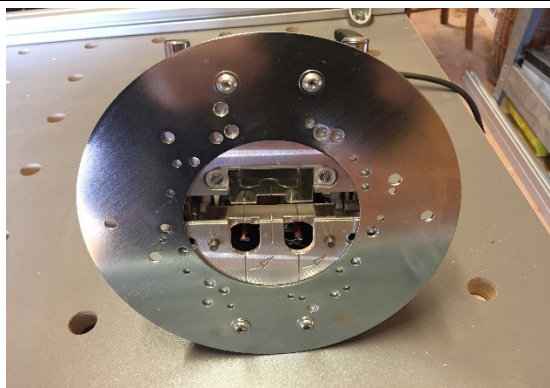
Adapter plate type OF 100 fixed on the sole of the Duodübler
